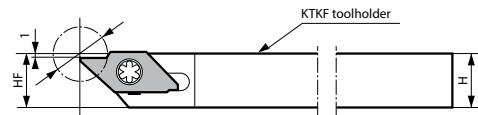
When a TKF-AS / -ASR insert is attached (The cutting edge is 1mm lower than the center line)
